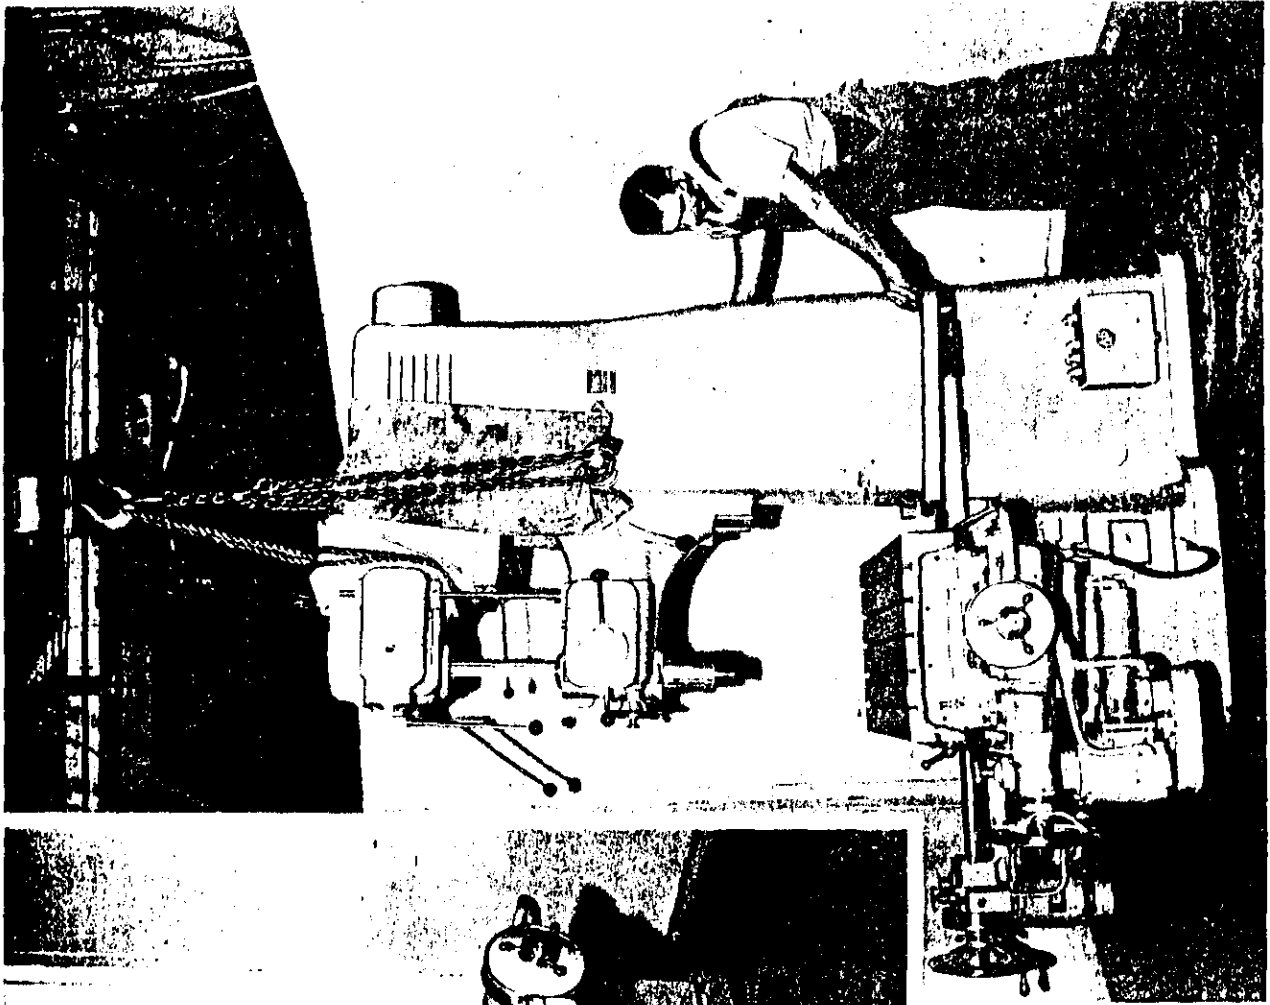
With a 1½" bar through the holes in the column, place a sling around the bar to lift the column assembly. Place a second sling under the top head to balance the load. Before setting in place on the base, be sure that the mating surfaces are clean and free from burrs.
